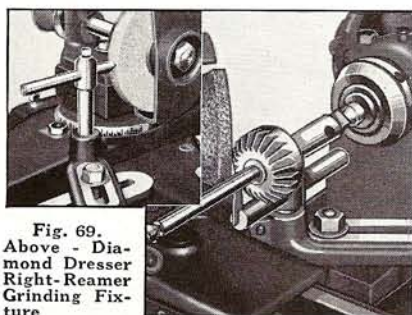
Above - Diamond Dresser Right-Reamer Grinding Fixture
